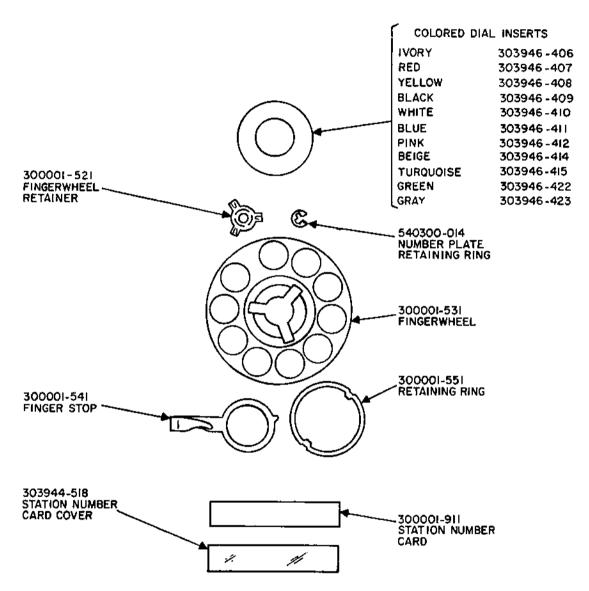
Stromberg-Carlson Number 300001-531 Polycarbonate Fingerwheel and Assembly.
